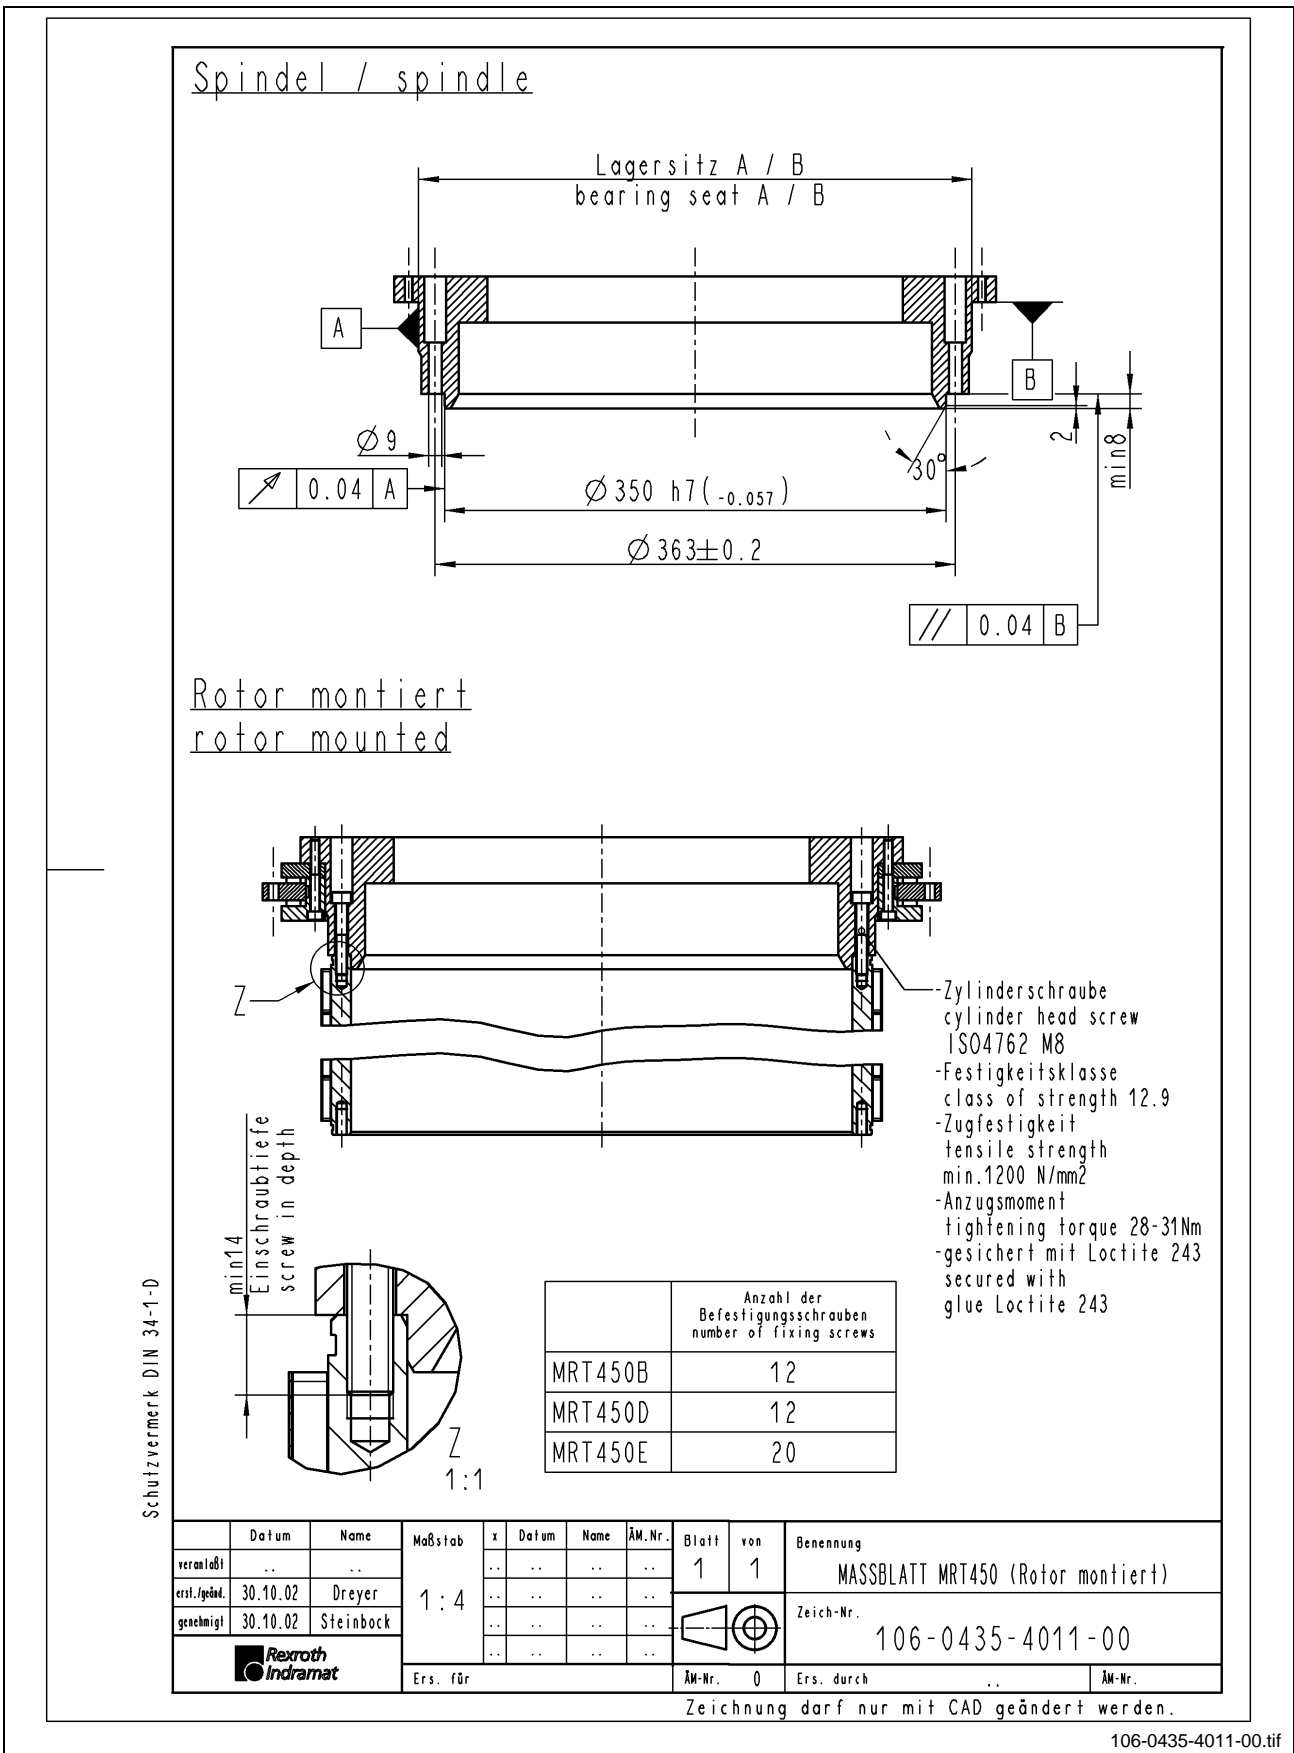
Dimension sheet Rotor MRT450, mounted
